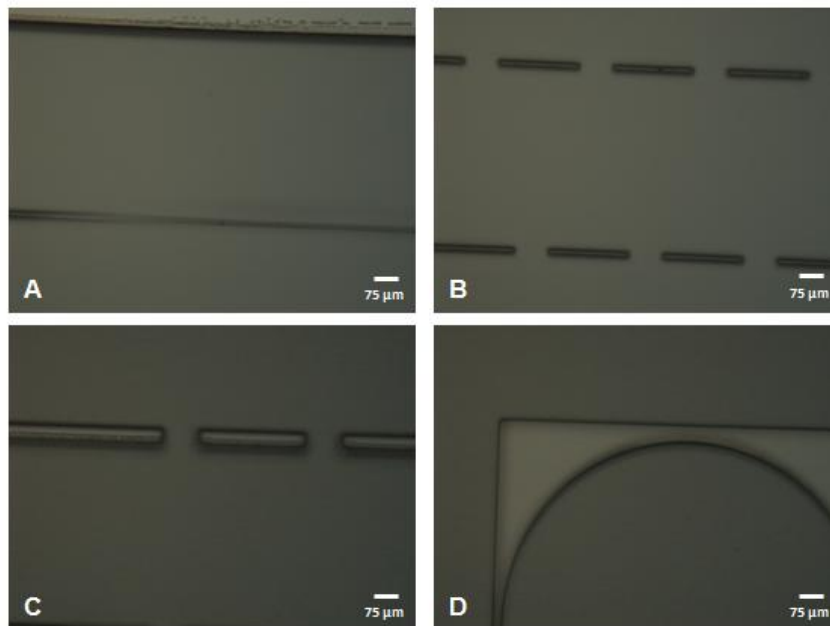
Microscope inspection of the SU-8 mold after fabrication (Leica 10x). Pictures A and B represent molds not well defined and pictures C and D exemplify the result of a good fabrication
